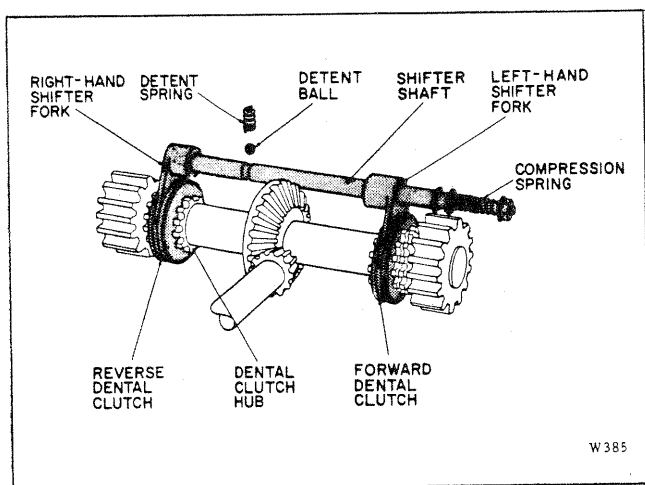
DENTAL CLUTCH ASSEMBLY, DIRECT DRIVE WINCH
